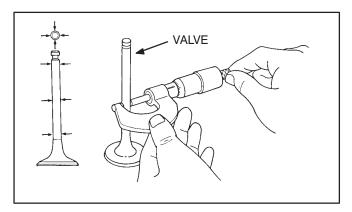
MEASURING VALVE STEM DIAMETER
